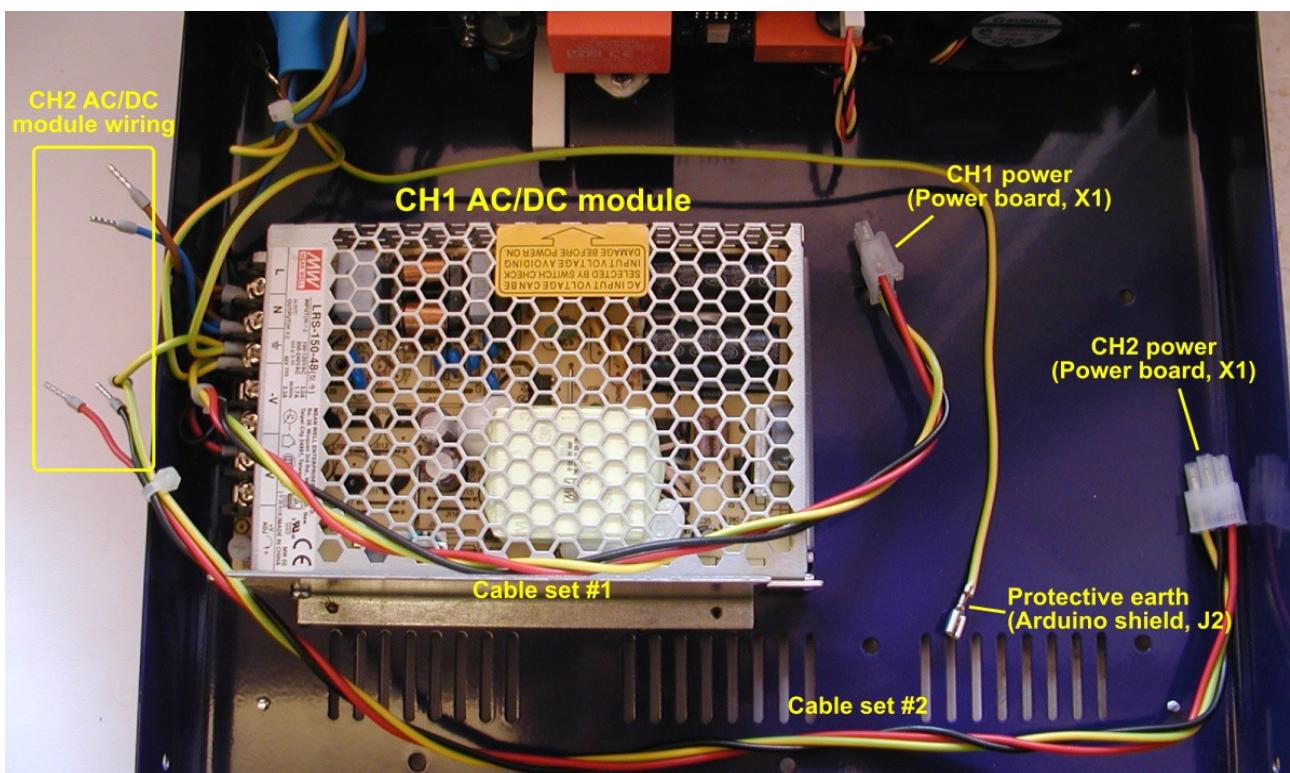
Bottom (CH1) AC/DC module with Cable set #1 mounted
